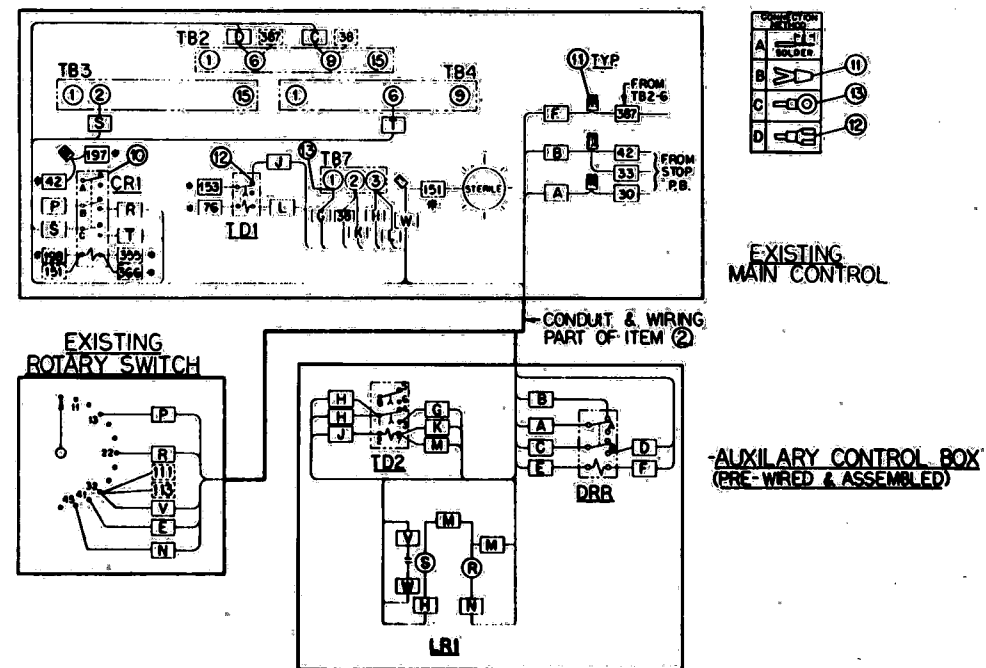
CONTROL ASSEMBLY MODIFICATION KIT.
